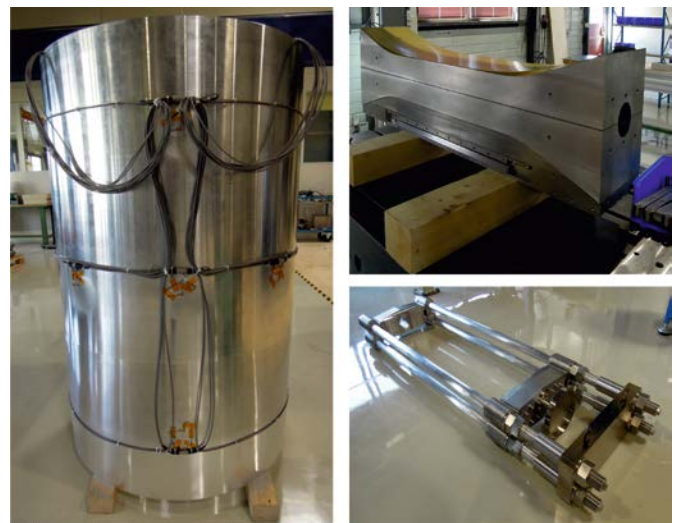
Aluminium shell, dummy coils, and axial support system.
